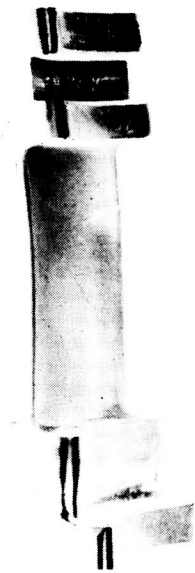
PWA 658 Uncooled Solid Blade Specimen After Test No. 8
